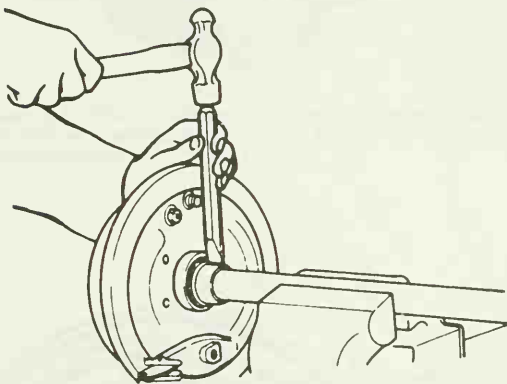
The first step in removing the retainer is to cut it with a chisel or grind it down with a grinder. (Nissan Motor Corporation in USA)
